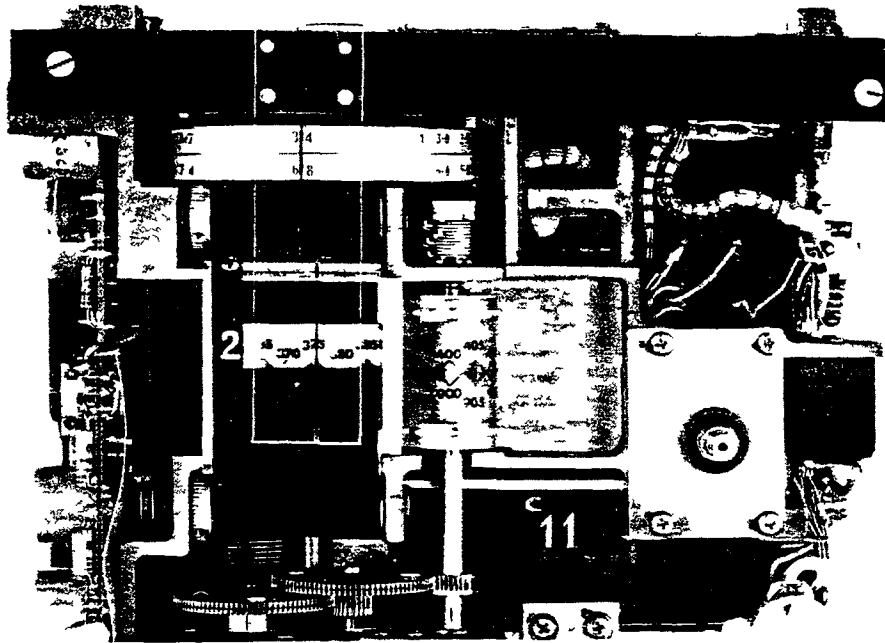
TRA13 cursor jig, details of manufacture and fitting
